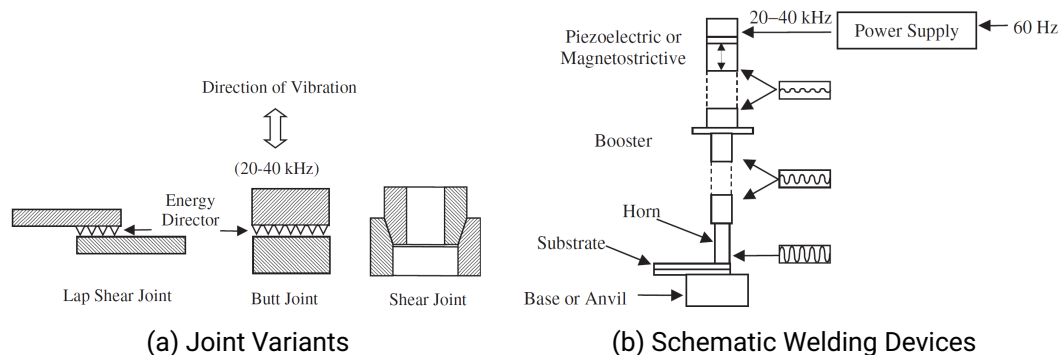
Ultrasonic Welding Fundamentals (Yousefpour et al. 2004, 316)
